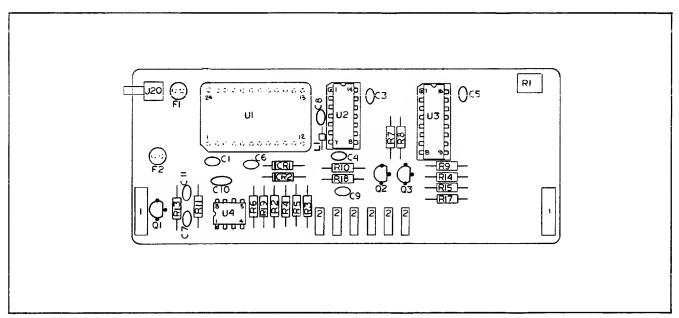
A14 1000 MHz Prescaler PCB Assembly
